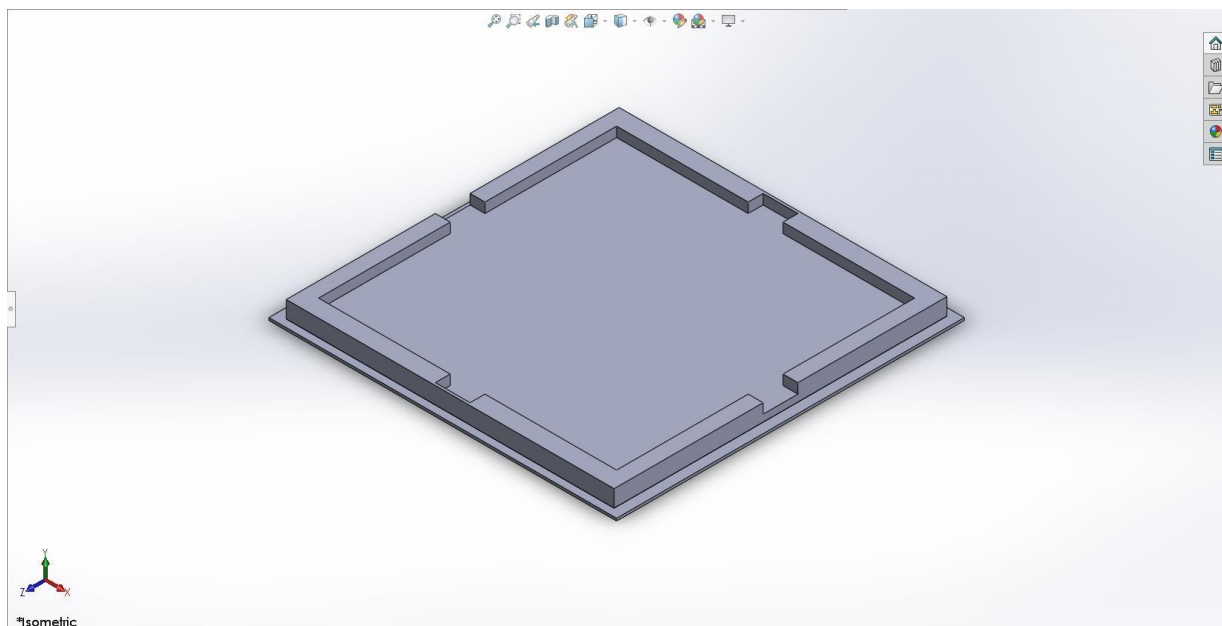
3D view of the bottom plate for the OLED vacuum chamber. The dimensions are 16.75 mm in length, 16.5 mm in width, and 0.85 mm in height. Specific features such as an impression are used on the bottom plate to ensure proper encapsulation of OLED.
